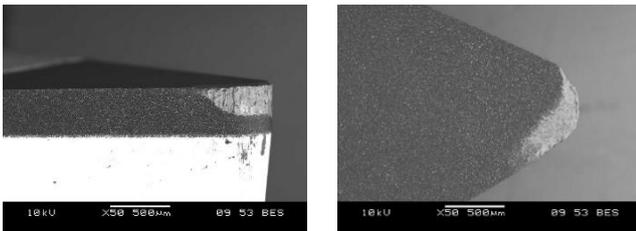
PCD tools after turning AK7-SiC material: a) surface of application, b) rake surface (cutting speed: 500 m/min, feedrate: 0.10 mm/rev, depth of cut: 0.5 mm)
